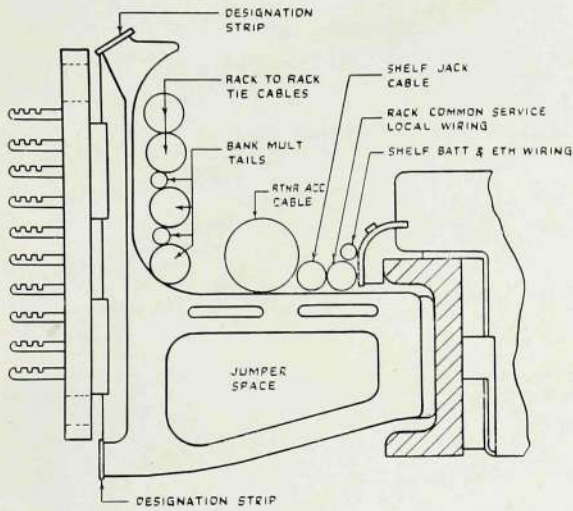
Cross-Section of Shelf, showing Location of Cables and Wires
